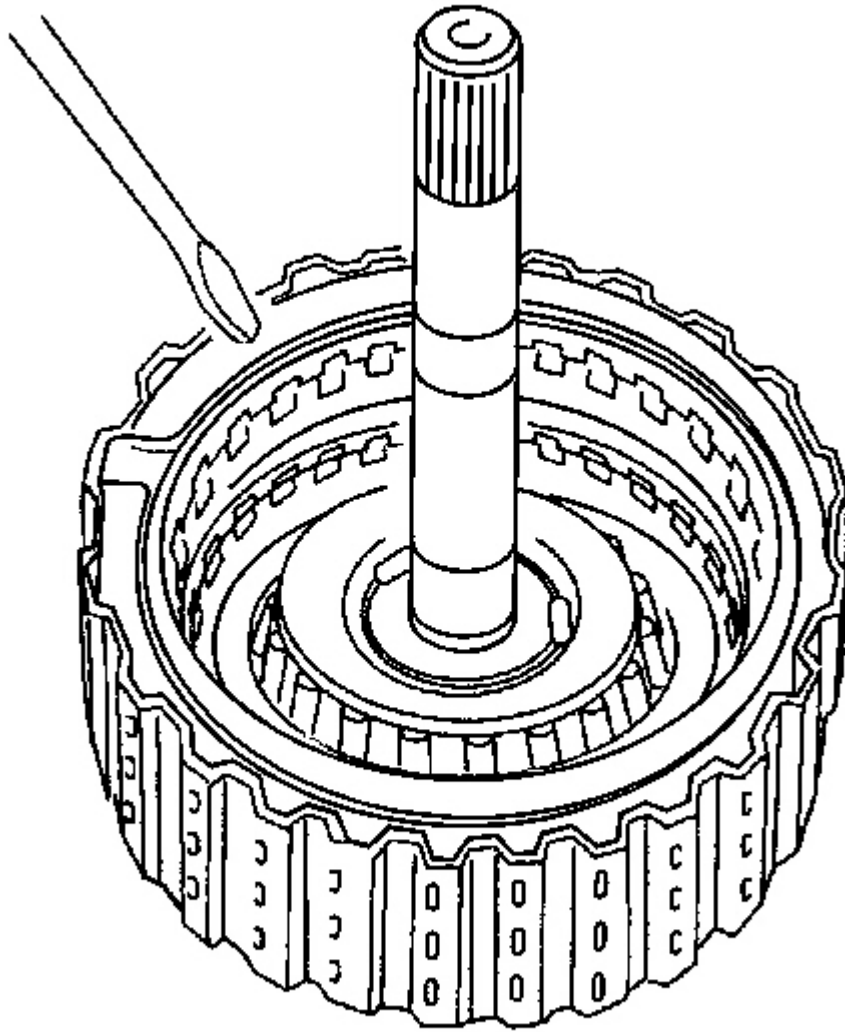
Removing Reverse Clutch Snap Ring Using A Screwdriver
